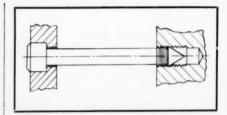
In this design, the screw is pointed to a 60-degree included angle so that the point tends to lead the threads on the screw into the tapped hole.
